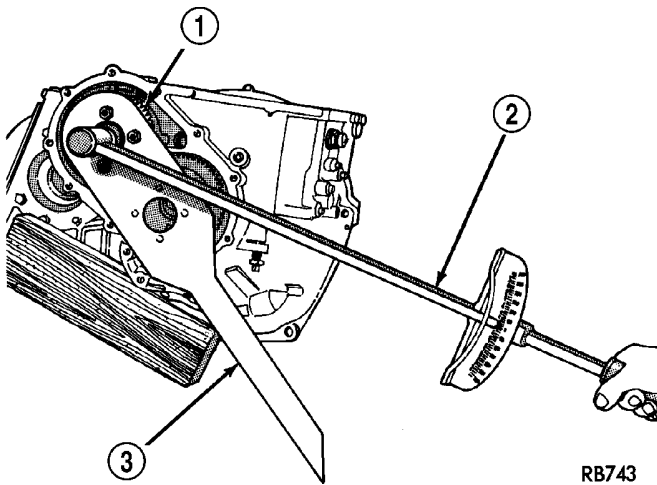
Tighten Transfer Shaft Gear Retaining Nut to 271 N-m (200 ft. lbs.)
